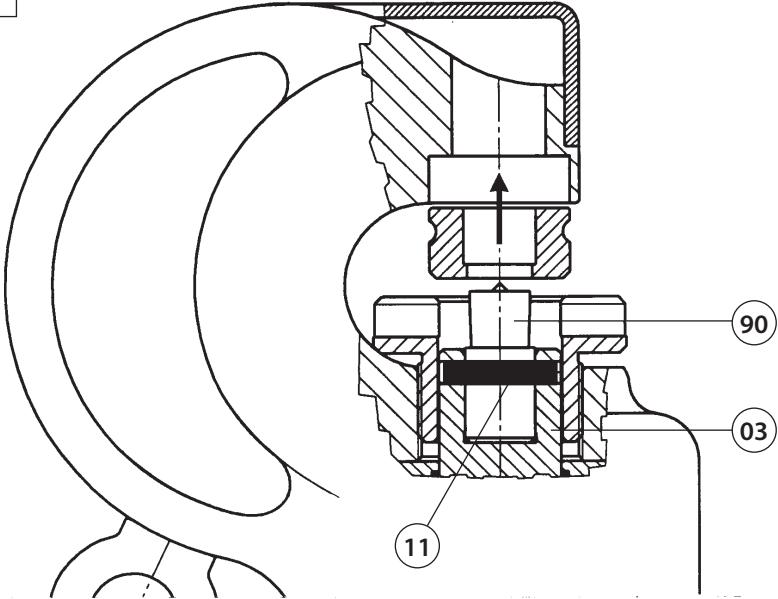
PUNCH ASSEMBLY MONTAGE DU POINÇON MONTAGE DES STEMPELS
